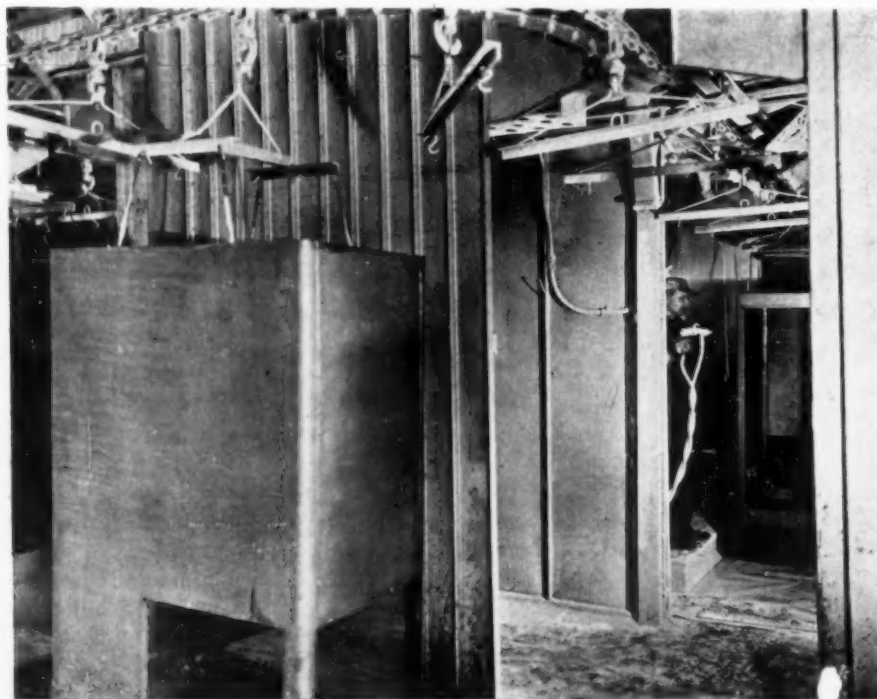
Looking through enclosure opening. Operator is seen ready to spray pieces as they pass along on conveyor. From here the pieces pass immediately into the drying oven.
